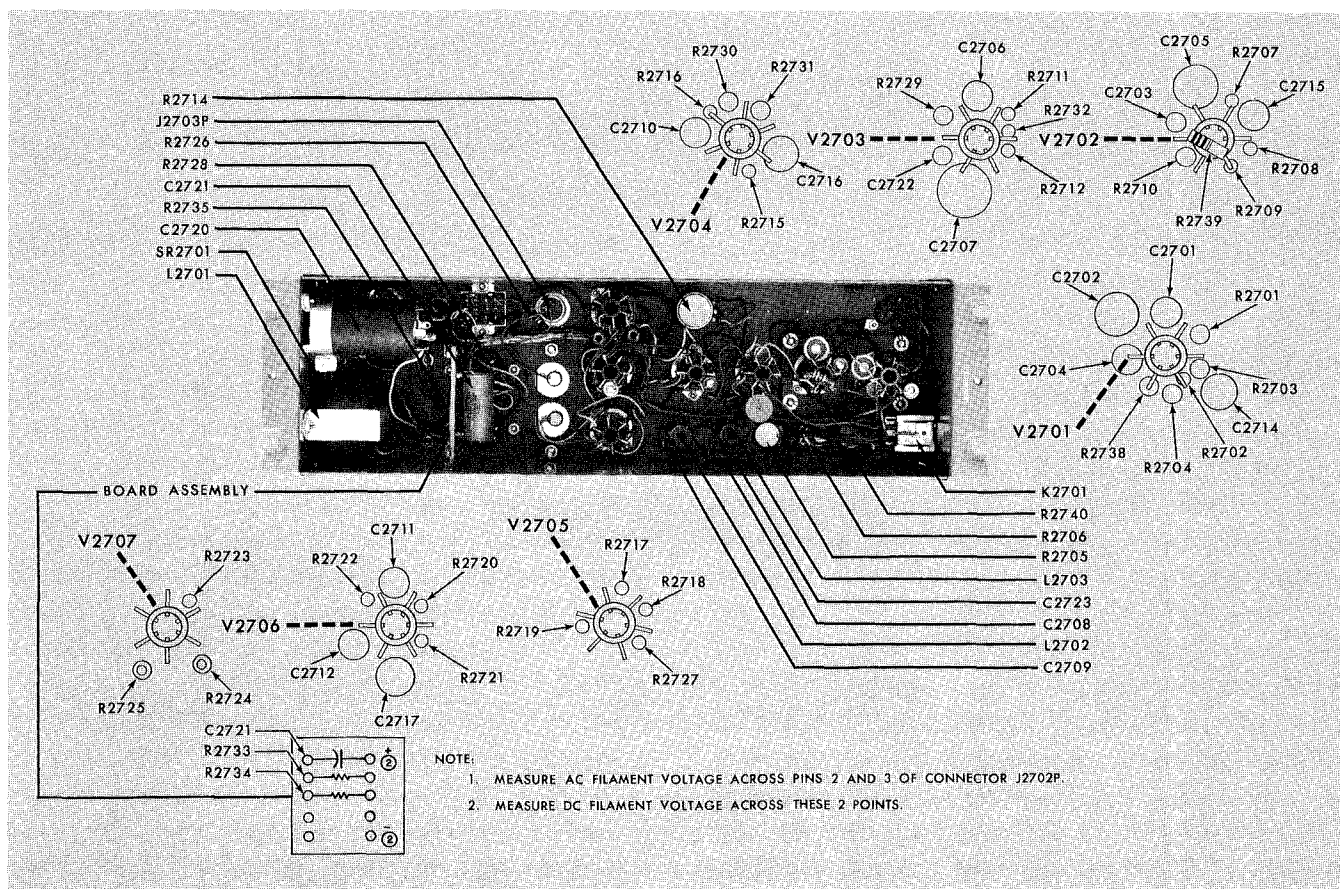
MASTER REPRODUCE PARTS LOCATION (INTERIOR VIEW)
